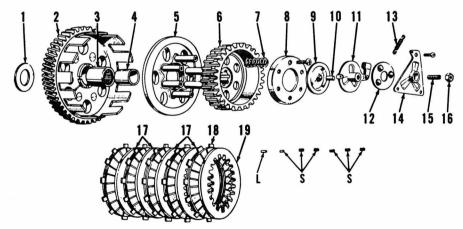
Exploded view of clutch assembly. The clutch adjusting screw (15) is also shown in Fig. K3-14.
